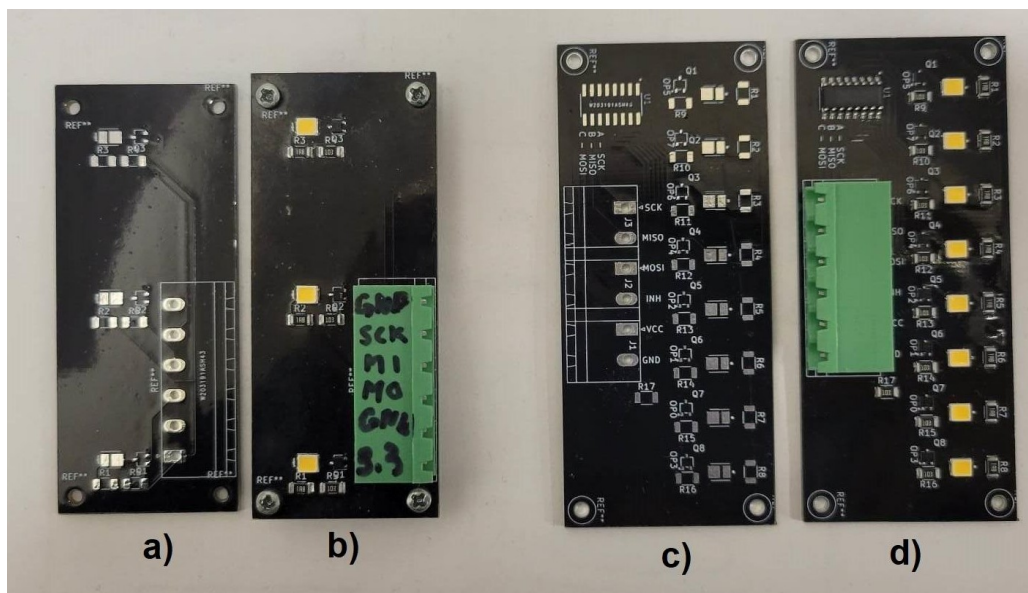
Lighting boards: a)Blank 3 light PCB, b)populated 3 light PCB, c)blank 8 light PCB, d)populated 8 light PCB
